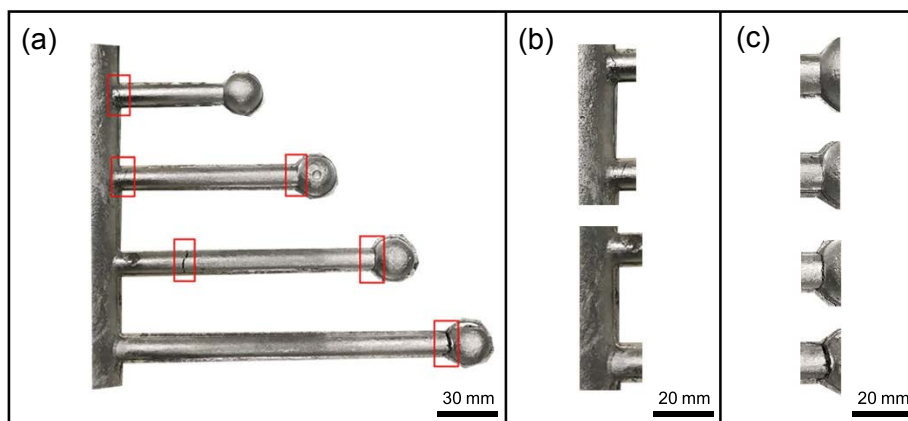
Macro morphology of hot tear in Mg-6Zn-2Gd casting alloy (a), close-up view of tears near the sprue (b), and close-up view of tears at the ball ends of rods (c)
